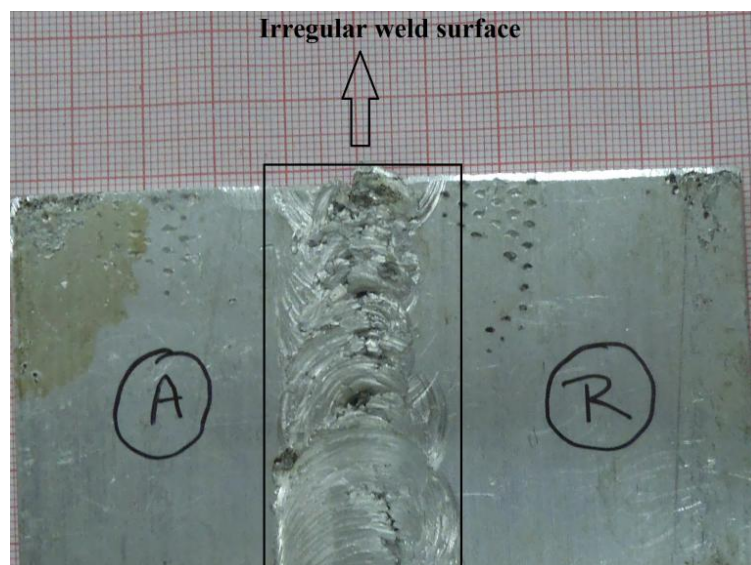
Irregular weld surface due to insufficient heat input.
